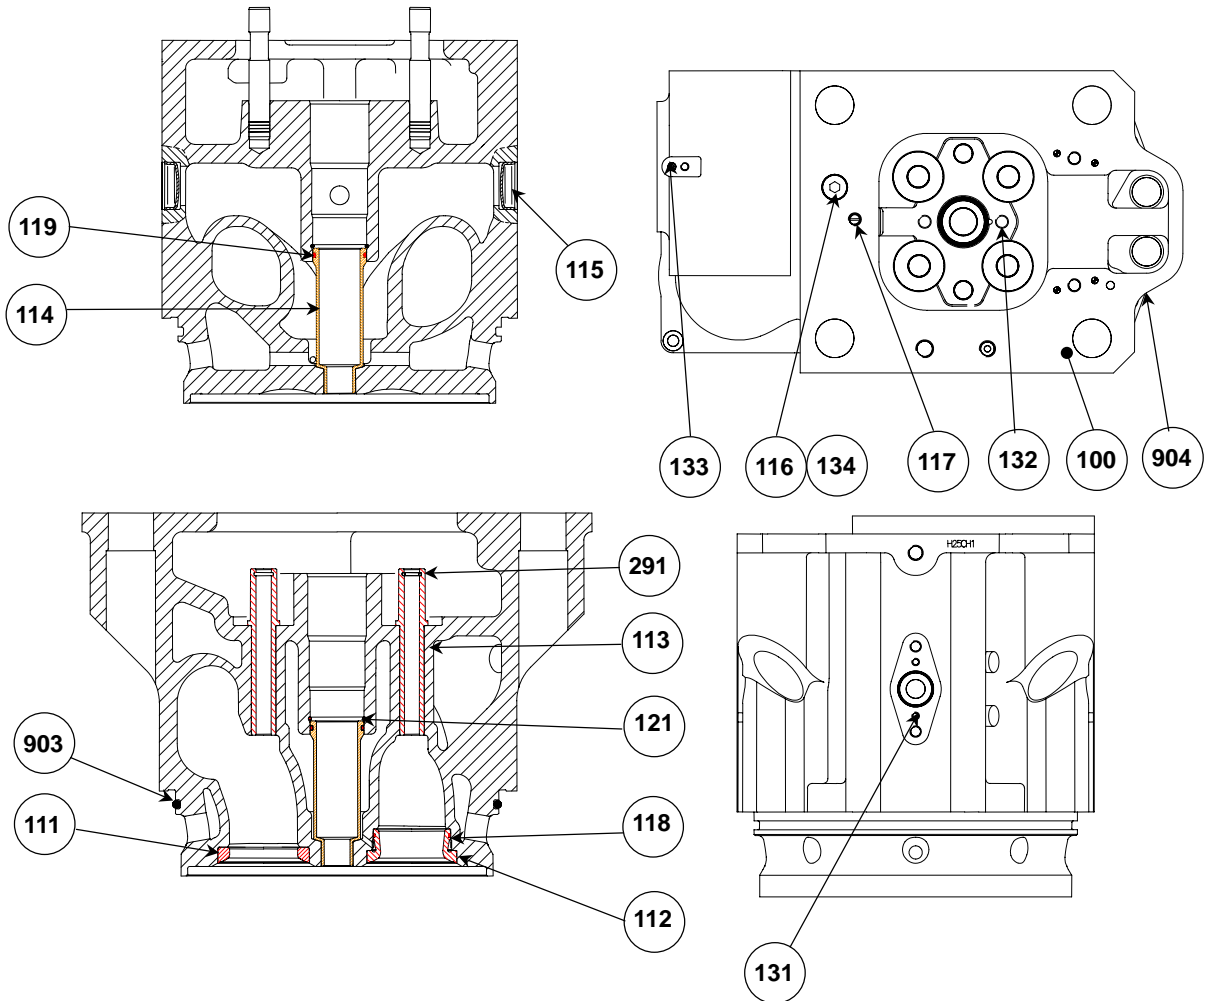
Check hole in cylinder head (실린더 헤드 점검 홀)
